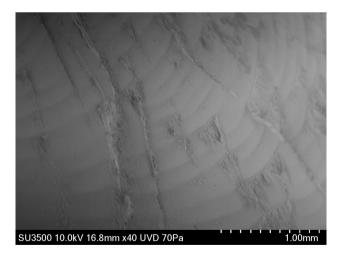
SEM image of the fracture surface showing a progressive brittle fracture
